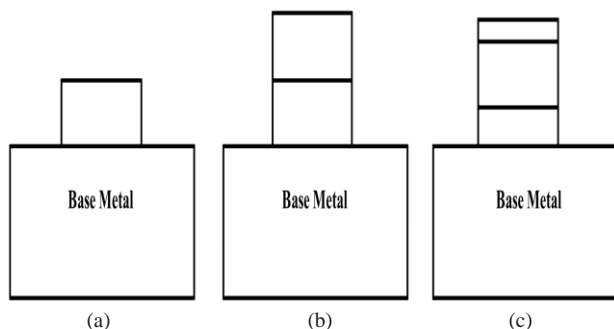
a view of the number and how layers (passes) are in the welded samples
